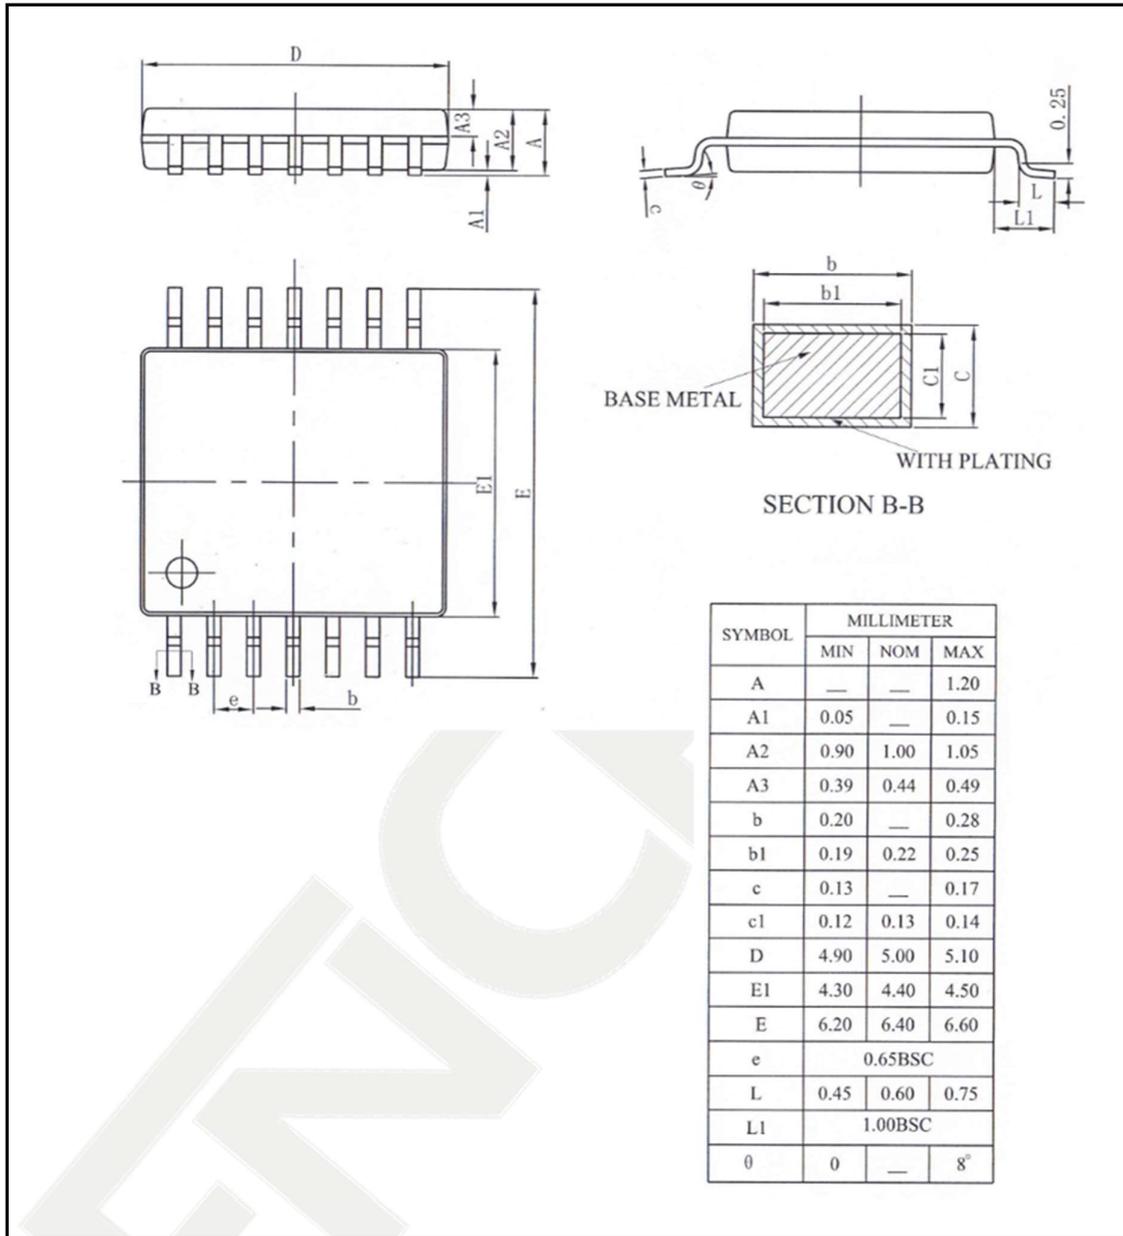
TSSOP14 Mechanical Data and Package Dimensions
